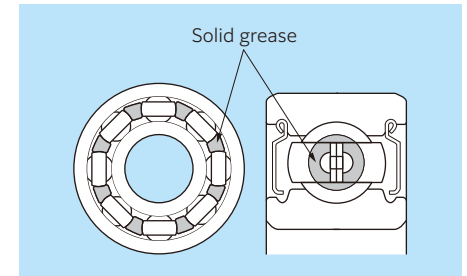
Deep groove ball bearing with spot-pack solid grease (ZZ shield) (Available for deep groove ball bearings)
